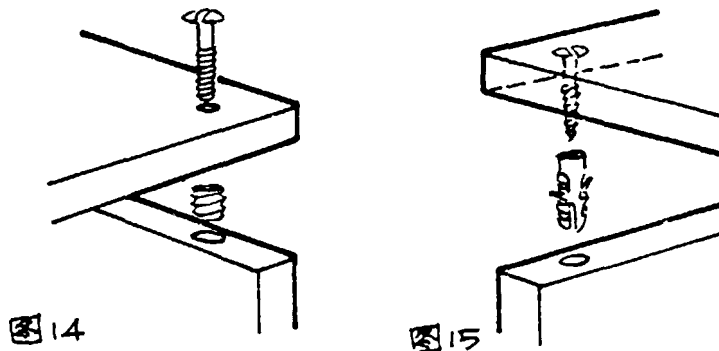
Tooth socket and machine screw Fig. 15: Plastic rawlplug screw
